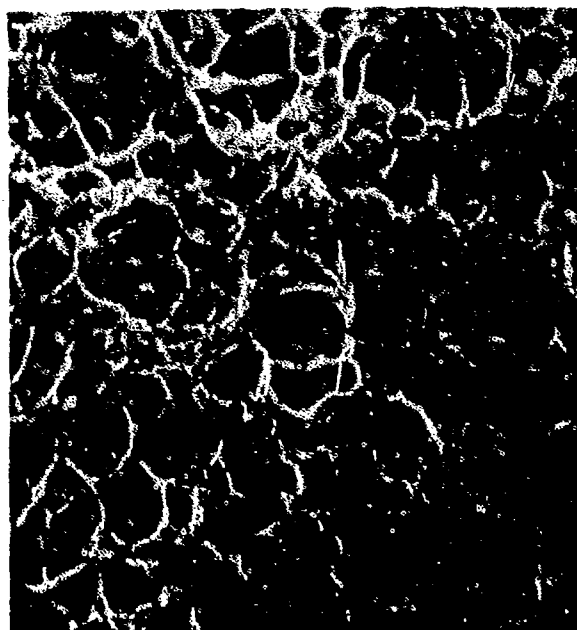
Fracture surface away from porosity defects, 3500x.
